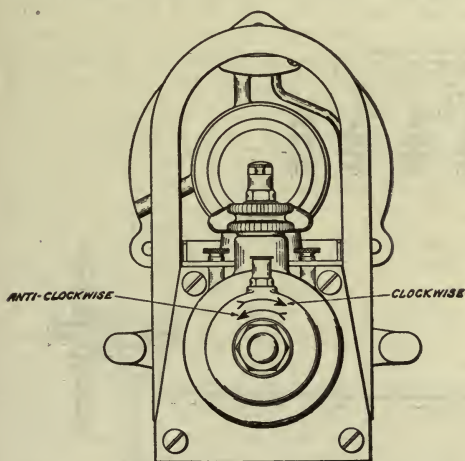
Full back view showing driving end. Arrow indicates direction of rotation.
